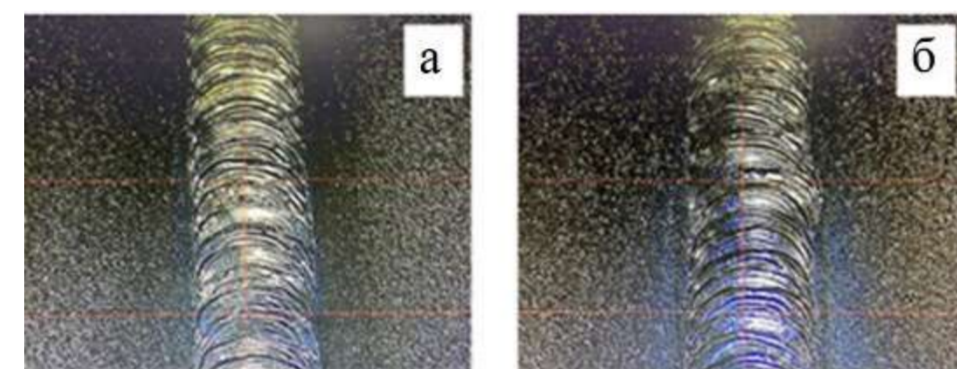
Appearance of the welded joint depending on the voltage and pulse duration: a) 280 V, 6 ms; b) 300 V, 6 ms.
